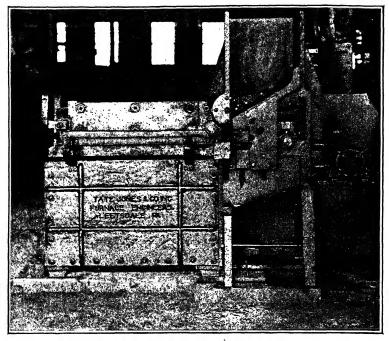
A Patented End-heating Furnace, Showing Charging Hopper.
